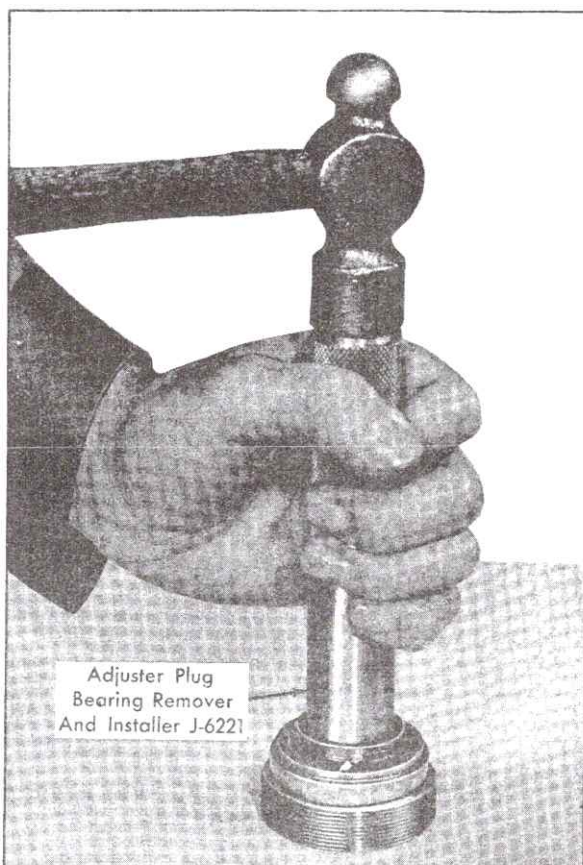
Removing and Installing Adjuster Plug Needle Bearing
